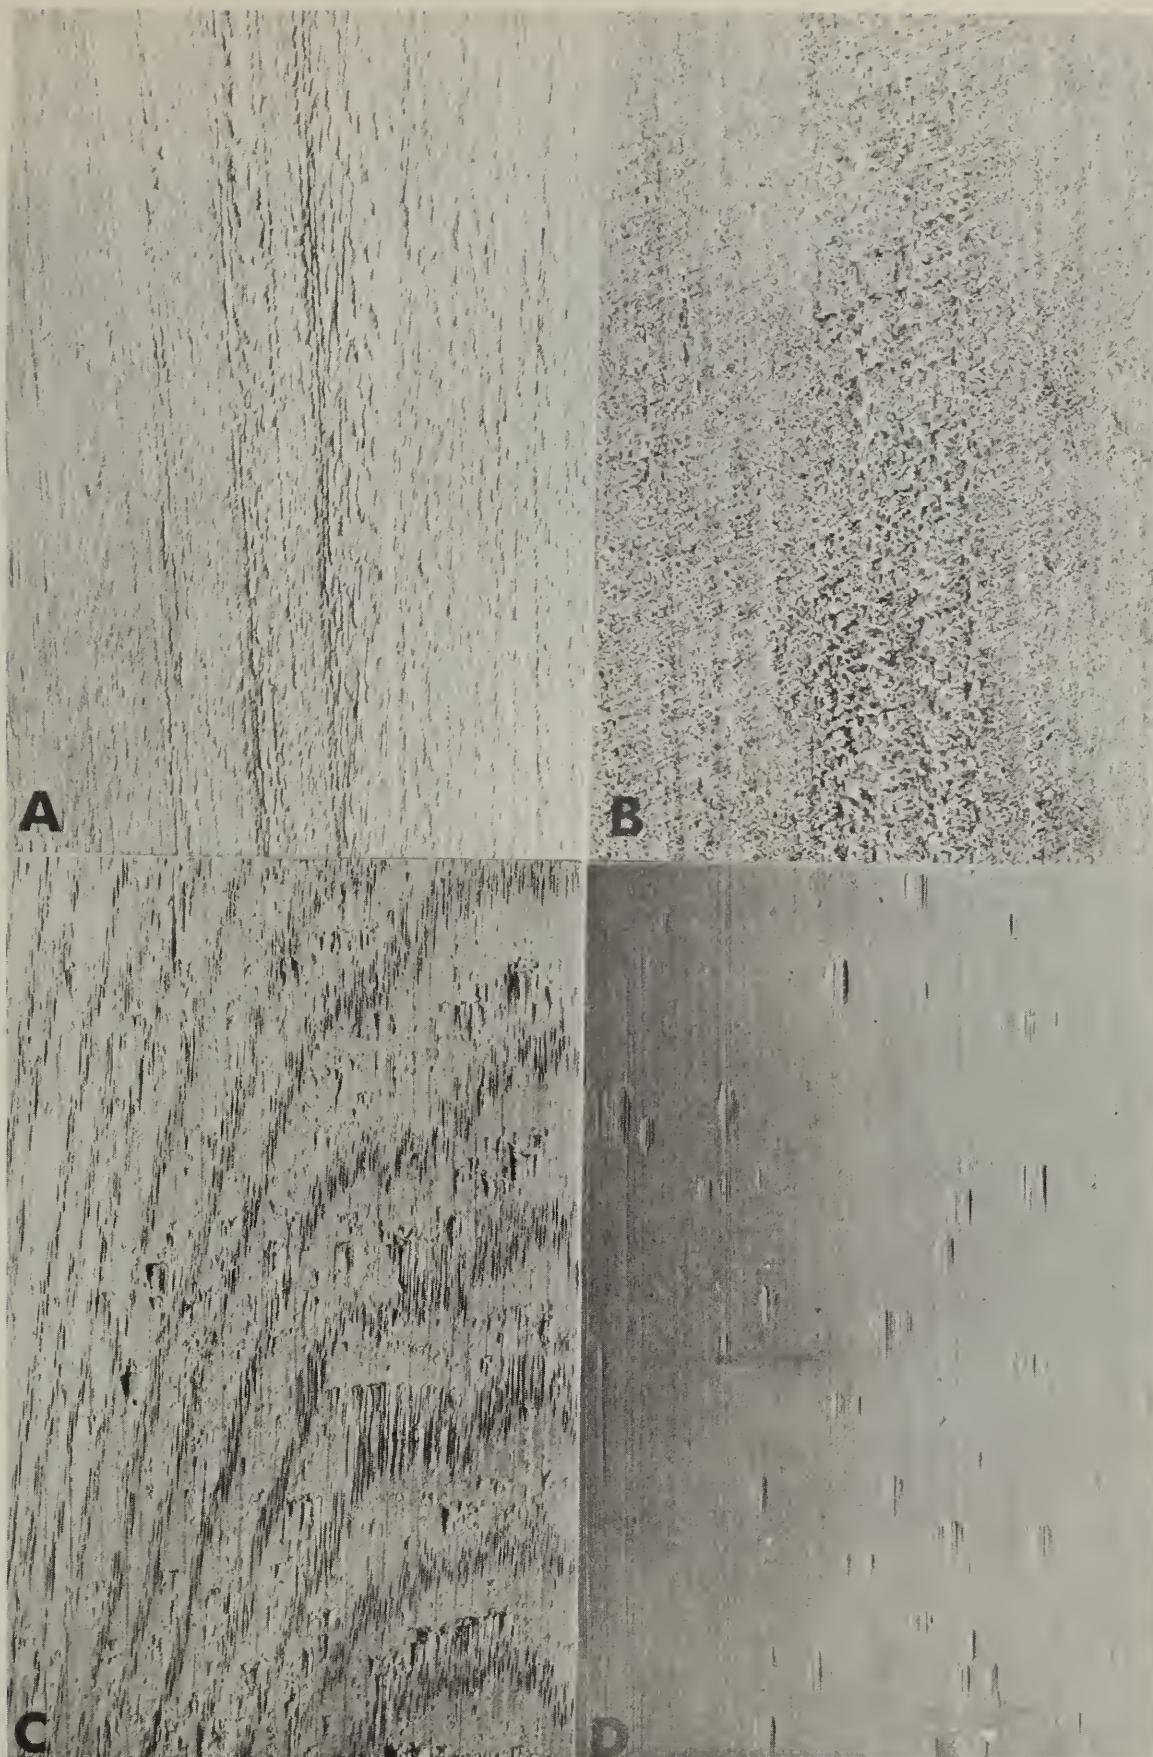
Machining defects evaluated in the shaping and planing tests: A, raised grain; B, fuzzy grain; C, torn grain; D, chip marks.
